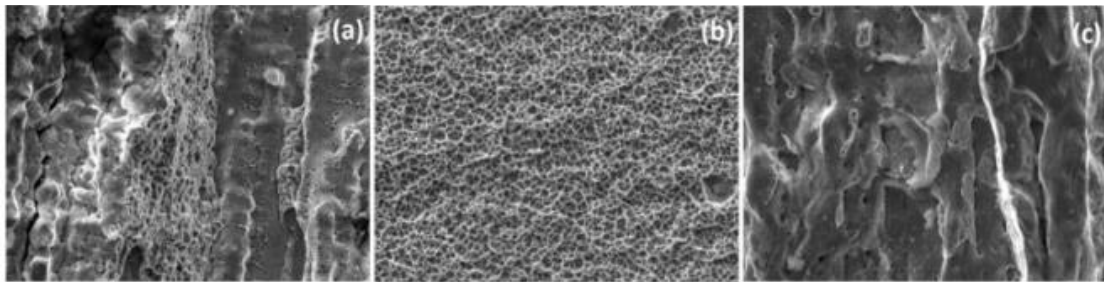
SEM fractography showing the fracture surfaces: a) the weld nugget, b) the HAZ - copper-alloy side, and c) the interface [1].
